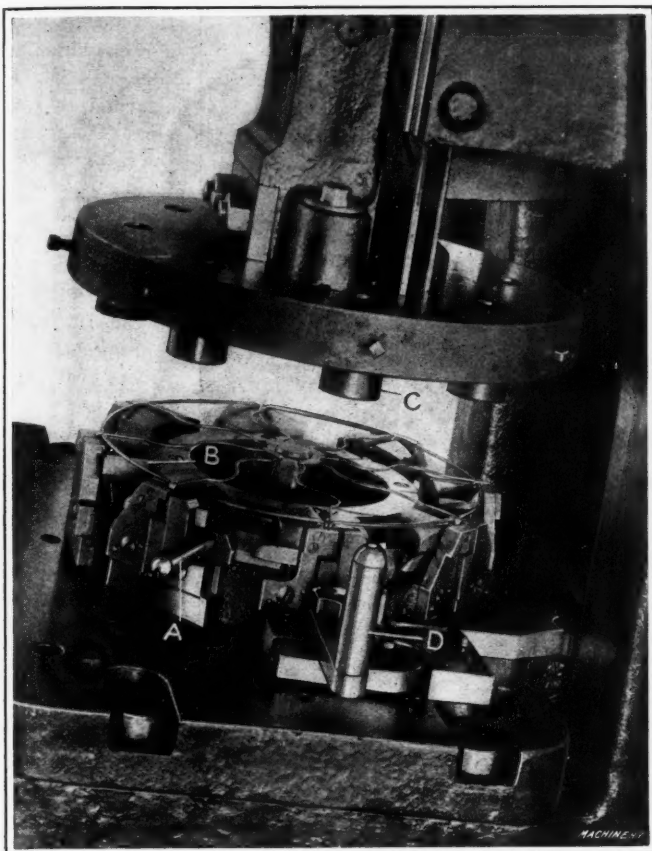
Inclined Press for assembling Front Rim Wire and Arms
